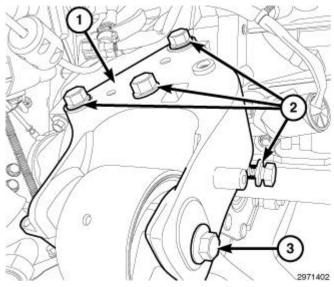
Actuator, Turbo, Heat Shield & Bolts Courtesy of CHRYSLER GROUP, LLC
